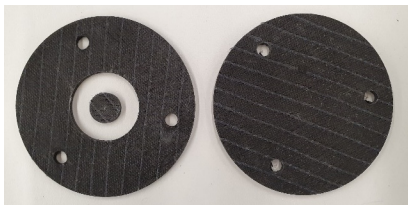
Example of machined composite specimens for the EMI shielding test.
